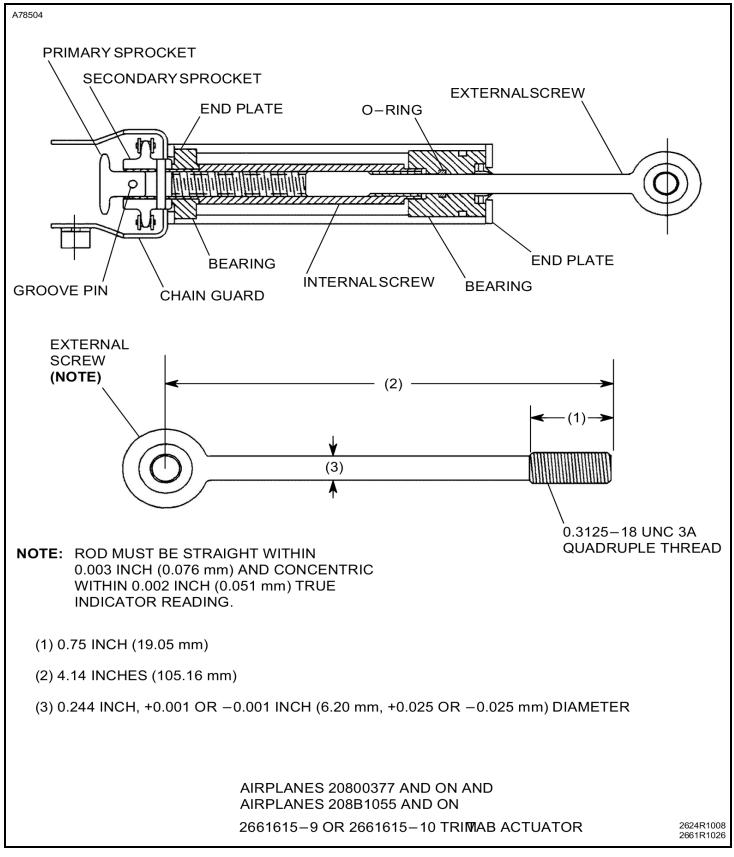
Sheet 8 : Aileron Trim Tab Actuator Disassembly/Assembly
